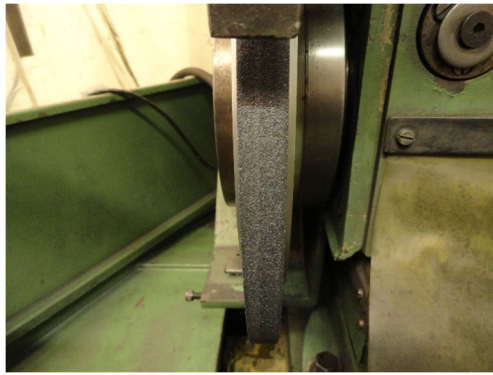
The grinding wheel after grinding process under MQL technique with wheel cleaning system
